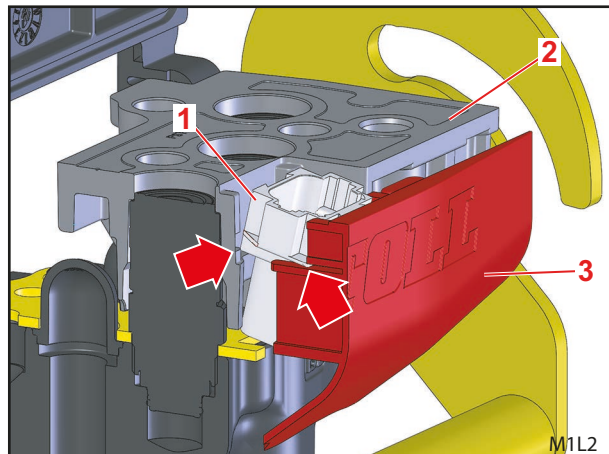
Installing the Hydro-Fix lower part – Electric plug connector and cover
